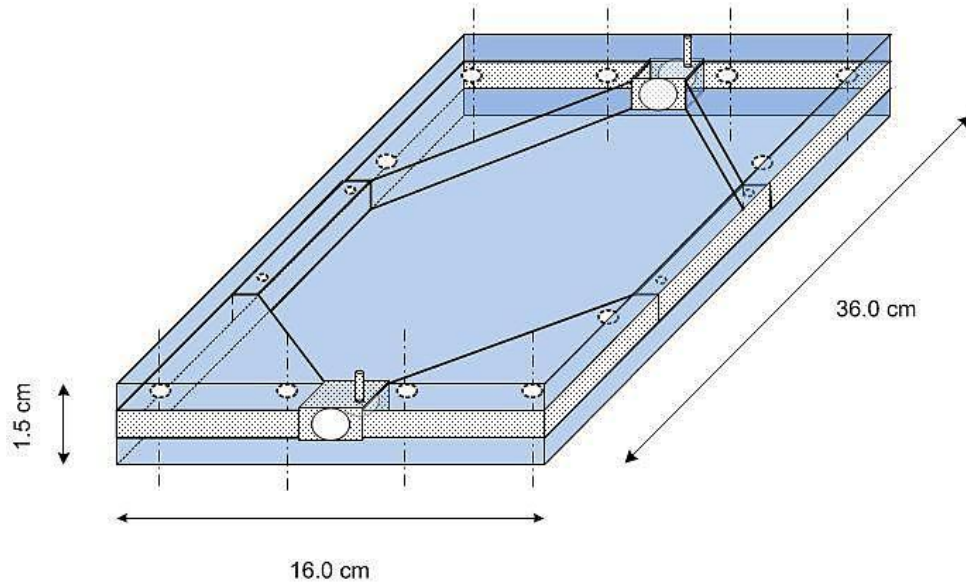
Brass mould for EPHPs – 3D view. The injection point is located at the inlet of the mould (front or back of the picture). The emulsion was pumped in the mould at a rate of 5-10 ml/min. The injection process was operated with the mould in vertical position to enhance the compaction of the emulsion.
